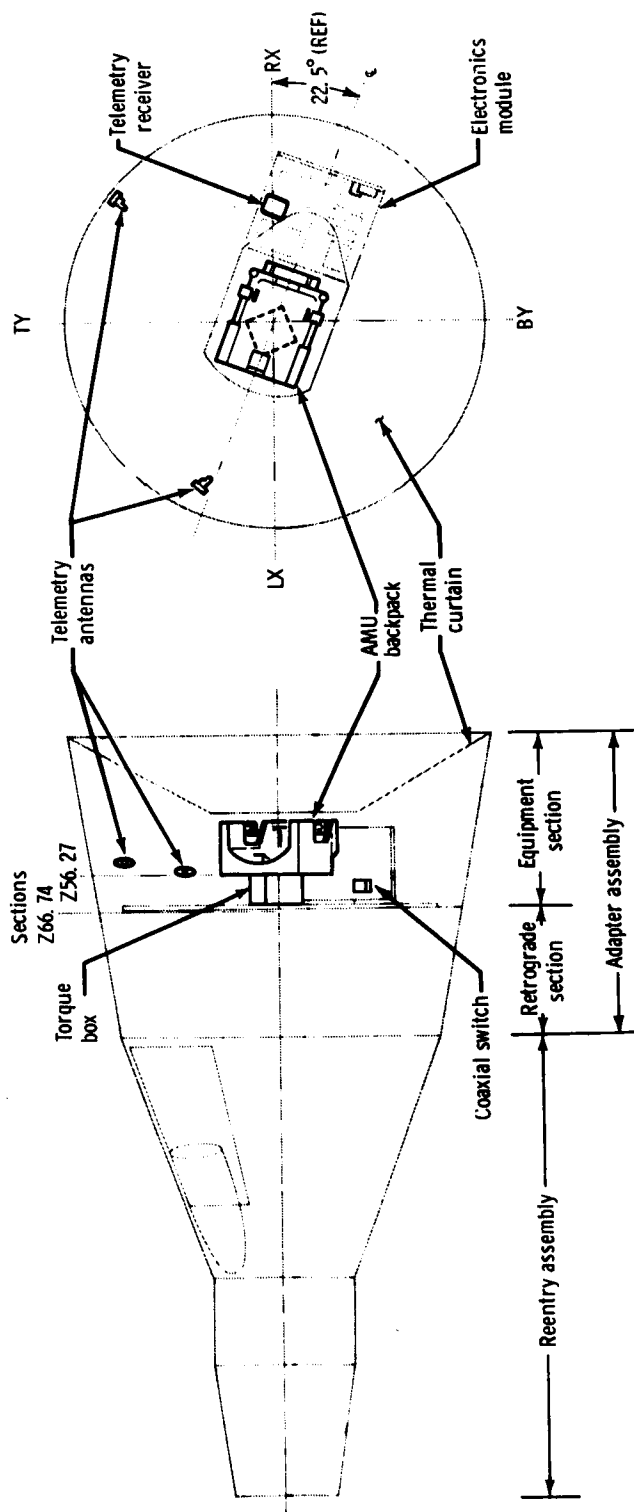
Astronaut maneuvering unit stowage in adapter assembly.
